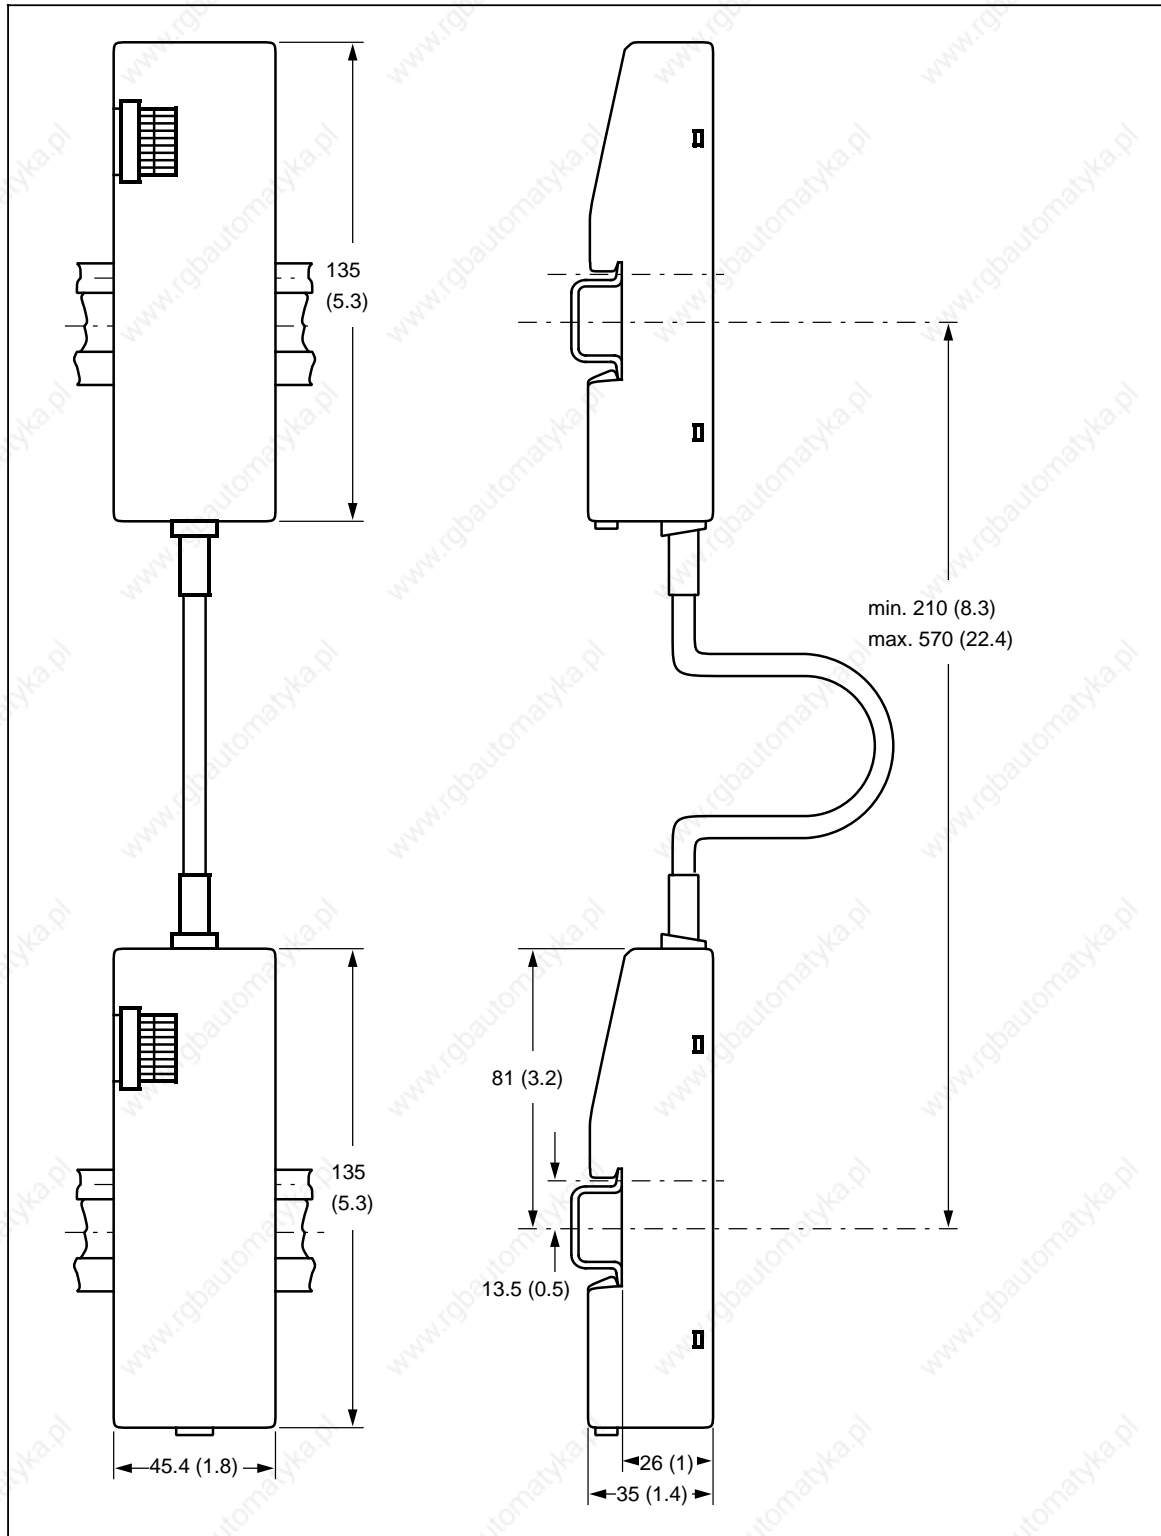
Dimension Drawing of the IM 315 Interface Module
